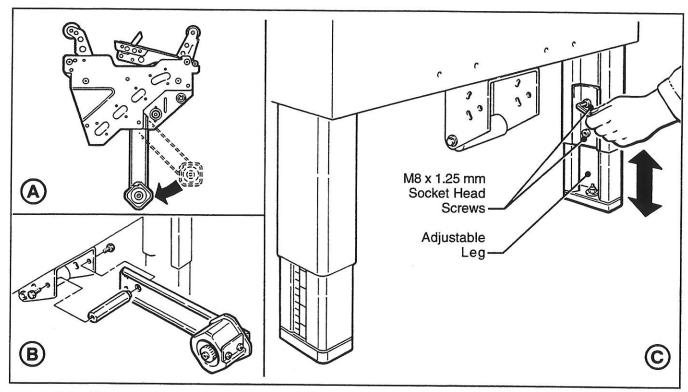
Conveyor Bed Height Adjustment and Lower Tape Drum Bracket Position
